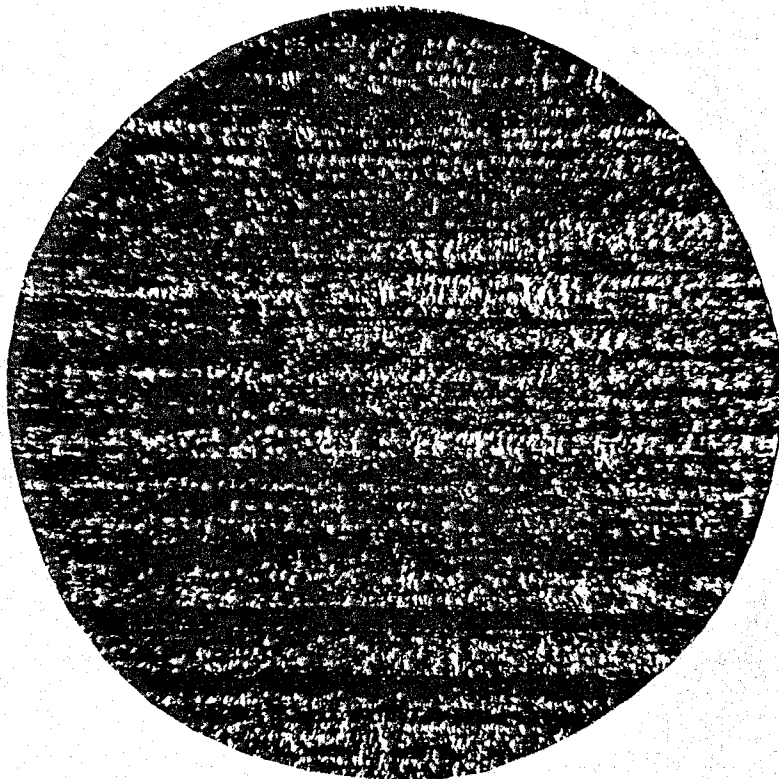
b: Aluminum Surface Formed Using Ethanol as the Cutting Fluid
